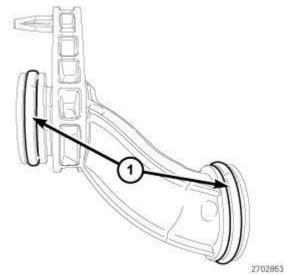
IDENTIFYING O-RING SEALS Courtesy of CHRYSLER LLC
